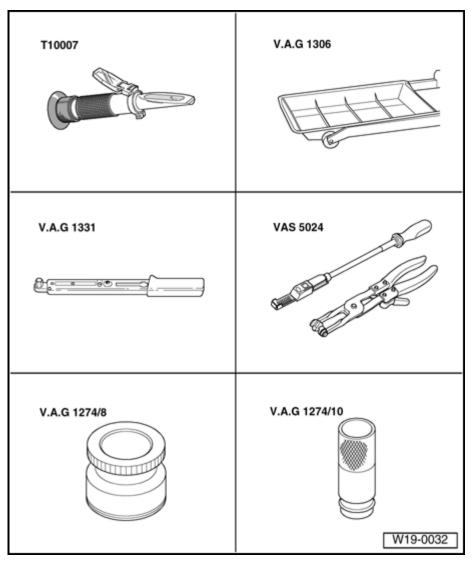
Identifying Special Tools - Coolant, Draining And Refilling Courtesy of VOLKSWAGEN UNITED STATES, INC.
